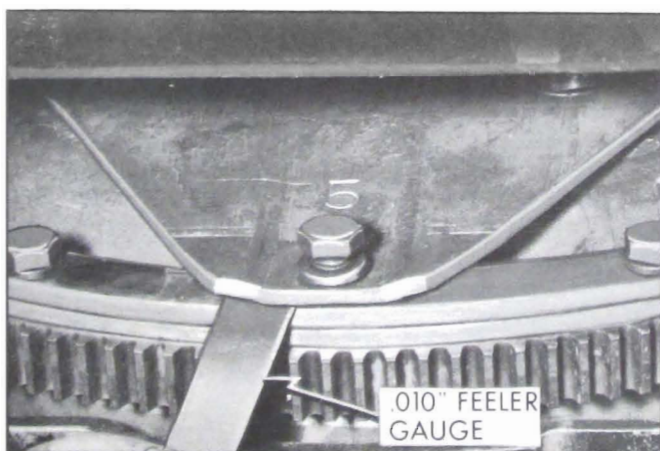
Checking Contact Between Pump Cover and Flywheel
